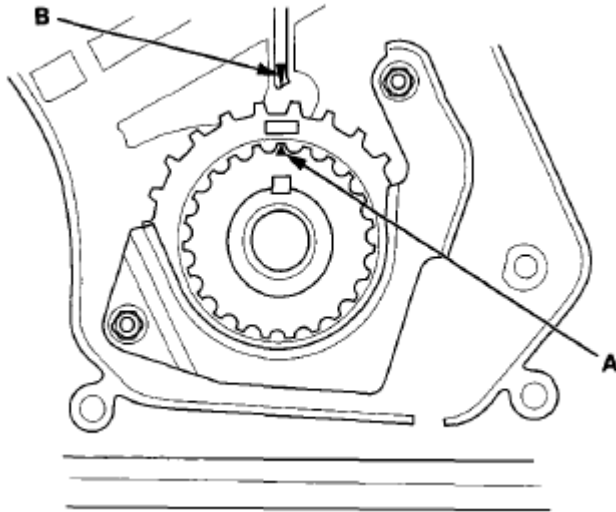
Identifying TDC Mark And Pointer On Oil Pump
